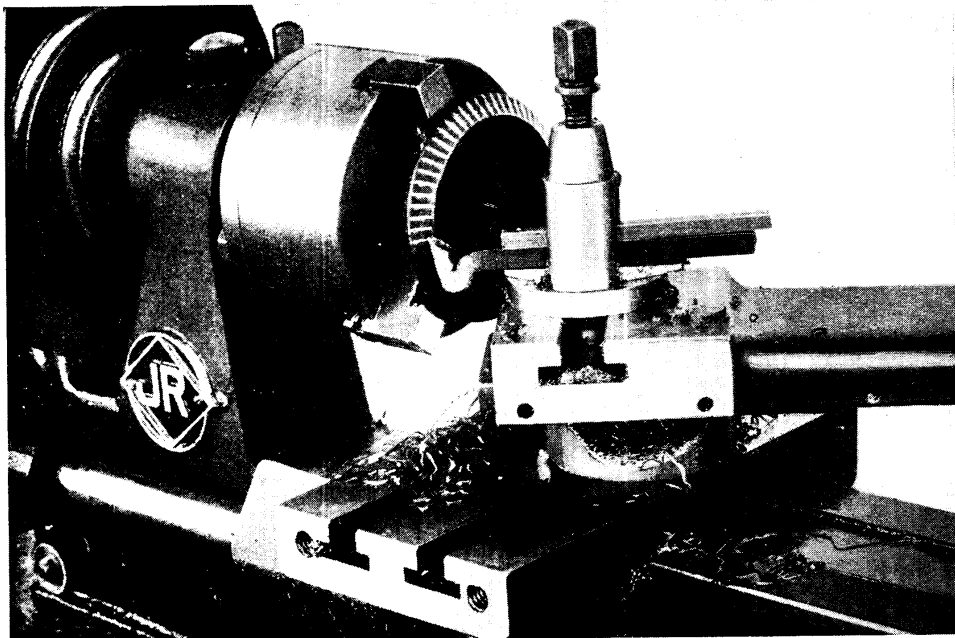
Calibrations are cut on a bevelled edge of a condenser dial with a V-pointed tool. This process is carried out without taking the dial off the chuck. The tool is held in the slide-rest tool clamp, and instead of rotating the chuck as for turning, the work is held fast and the cutting tool moved, the chuck being rotated one degree space after cutting a division
